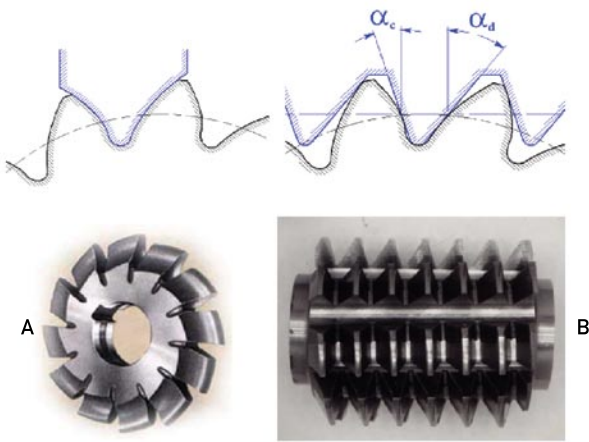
Tooling options: a-profile gear machining, b-generating gear machining.
